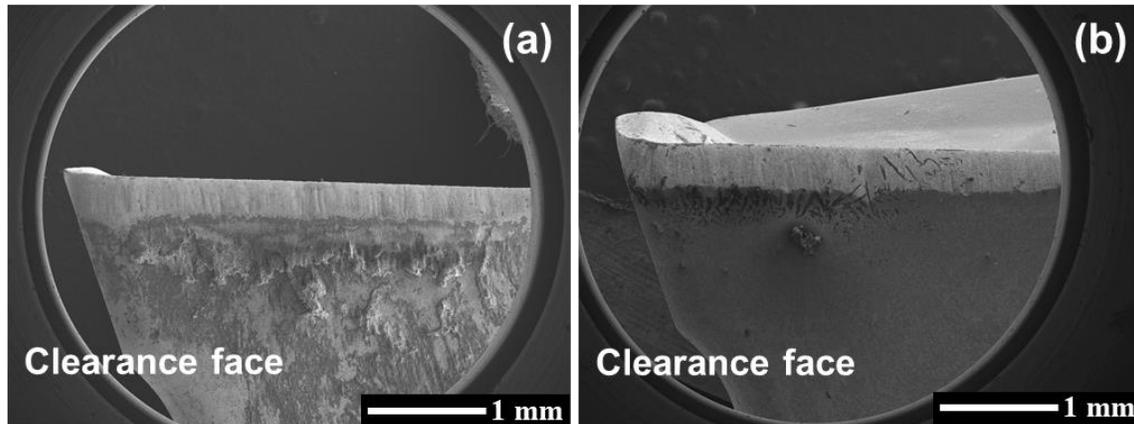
The wear of clearance face on (a) the uncoated tool and (b) YBG302 coated tool
